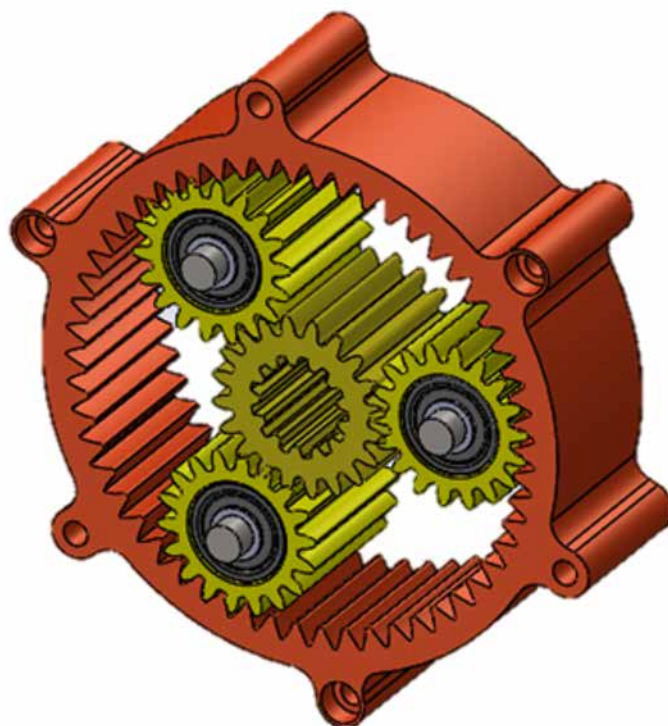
CAD assembly of UGR25 epicyclic gearbox in SolidWorks. (Courtesy: KISSsoft)
